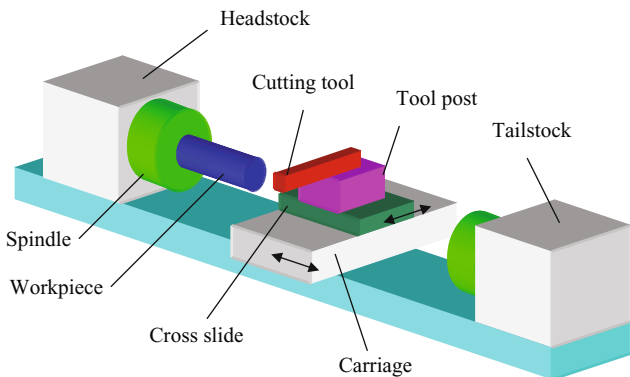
Schematic of manual lathe. The workpiece is clamped in the rotating spindle, but may also be supported at its free end using the tailstock. The cutting tool, which is clamped to the tool post, is moved relative to the workpiece by adjusting the positions of the carriage (axial direction) and cross slide (radial direction)
